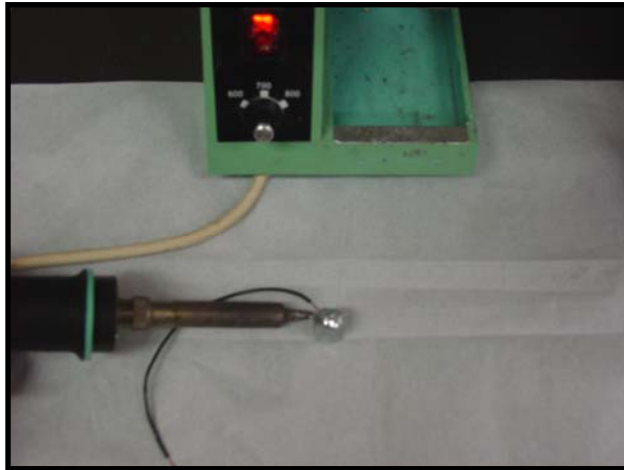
Soldering of the Cu wire to the Ir metal shot.
